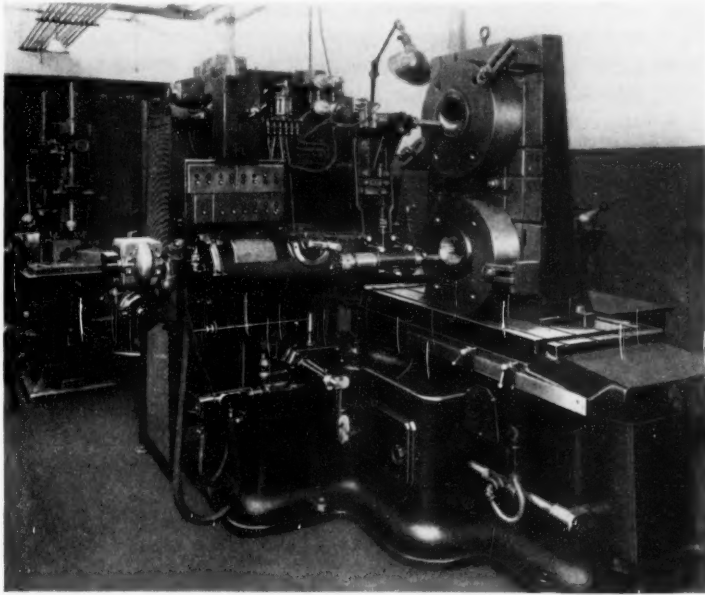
Milling on die sinking machine the contour of die block for sheathing lead-covered cable
